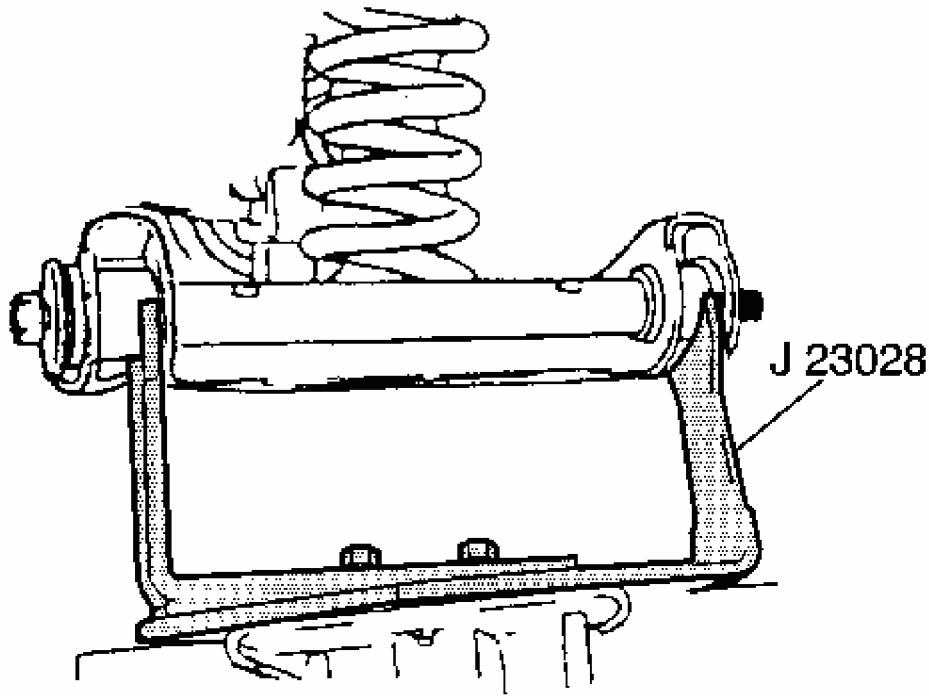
View Of J 23028-01 Cradling Inner Bushings
